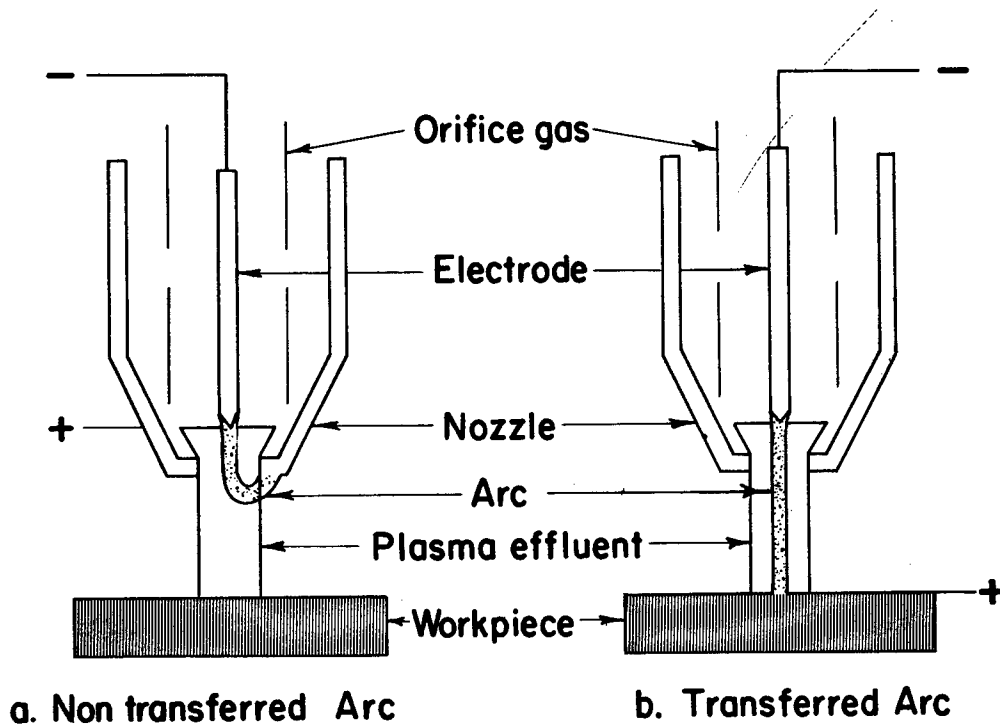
MODES OF PLASMA GENERATION FOR WELDING
